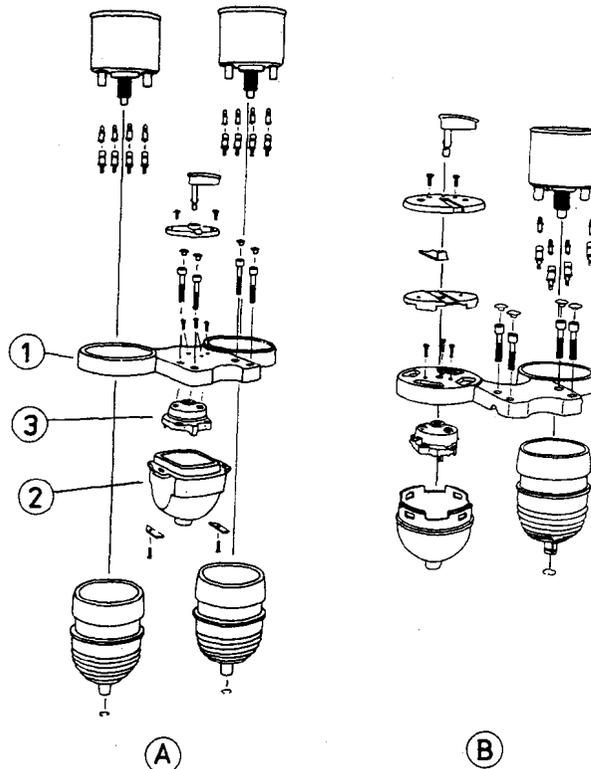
Exploded view of instrument pod (A) deluxe model (B) standard design
